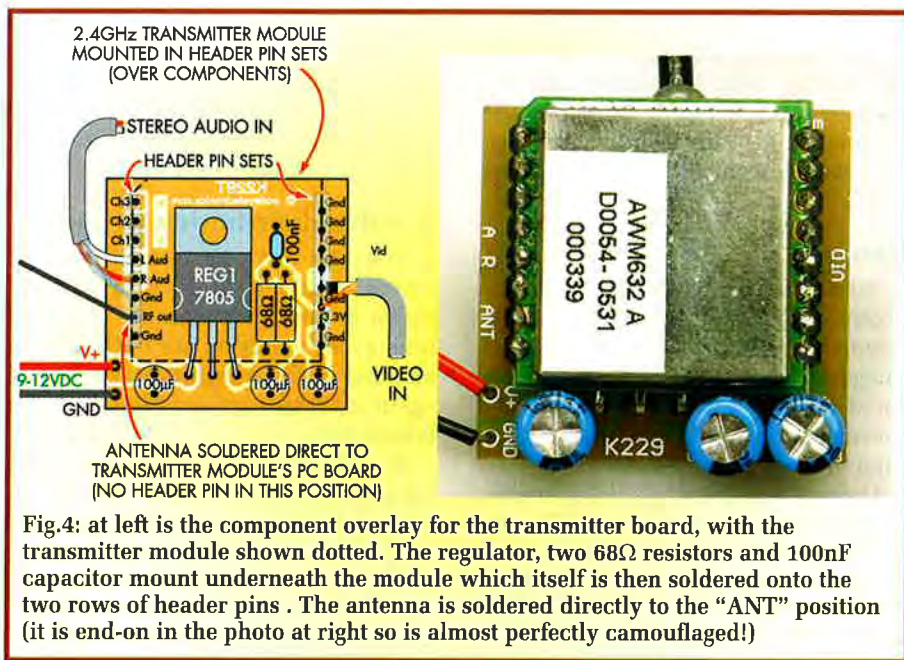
at left is the component overlay for the transmitter board, with the transmitter module shown dotted. The regulator, two 68Ω resistors and 100nF capacitor mount underneath the module which itself is then soldered onto the two rows of header pins. The antenna is soldered directly to the "ANT" position (it is end-on in the photo at right so is almost perfectly camouflaged!)
